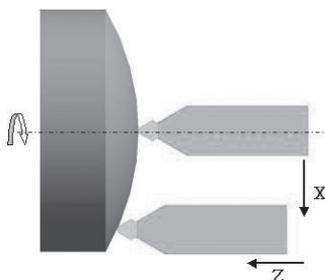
Schematic Illustration of Mold Processing by Two-Axis Numerical Control
